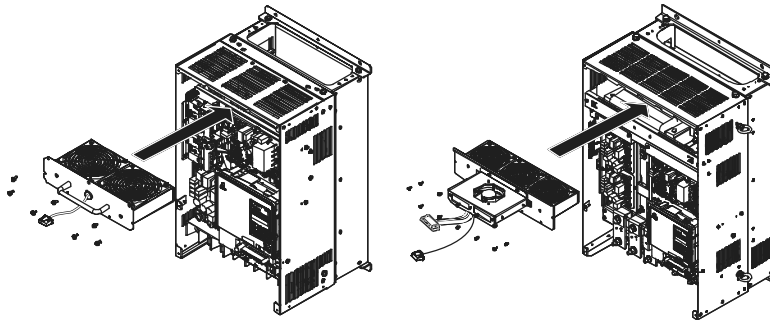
Installing the Cooling Fan Unit: 2A0165 to 2A0415, 4A0139 to 4A0362
